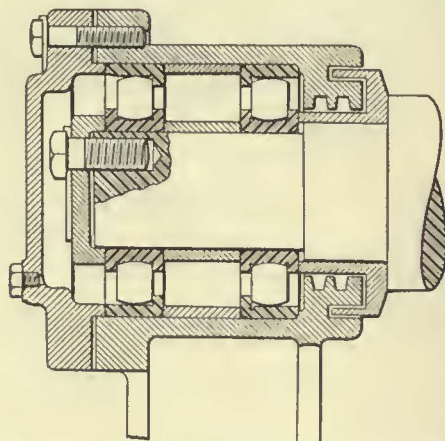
FISCHER BARREL BEARING MOUNTED IN JOURNAL BOX
